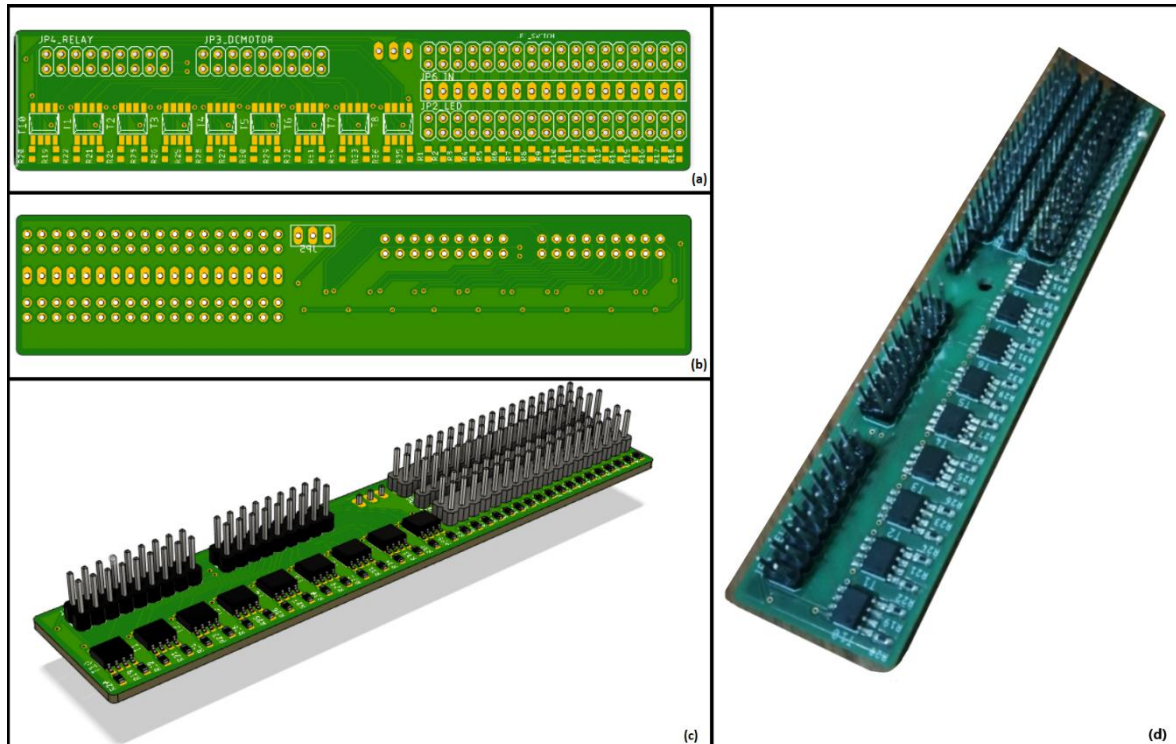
3D model of the pcb: (a) – top view; (b) – bottom view; (c) – 3D view with all components mounted; and assembled PCB (d).
